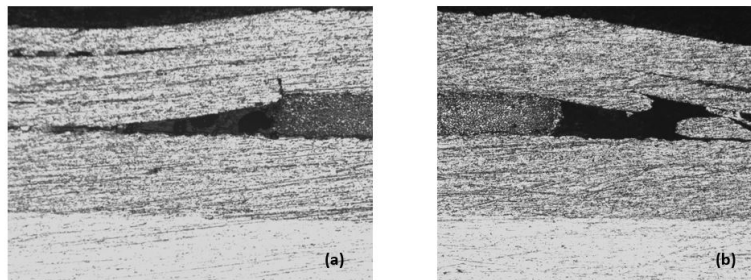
Al 6061/MetPreg weld right edge (a) and left edge (b) after re-polishing sample shown in Figure 2.1.
